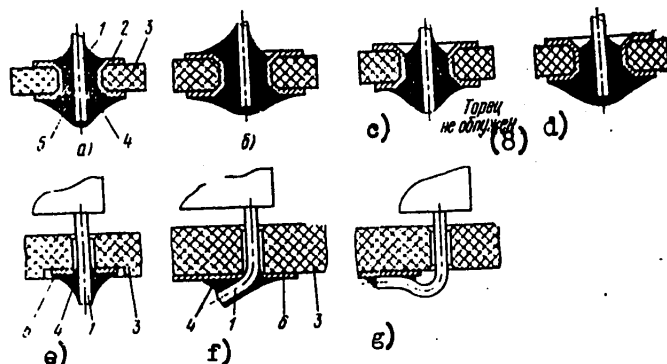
Examples of soldering housings with plug-coupler leadouts:
